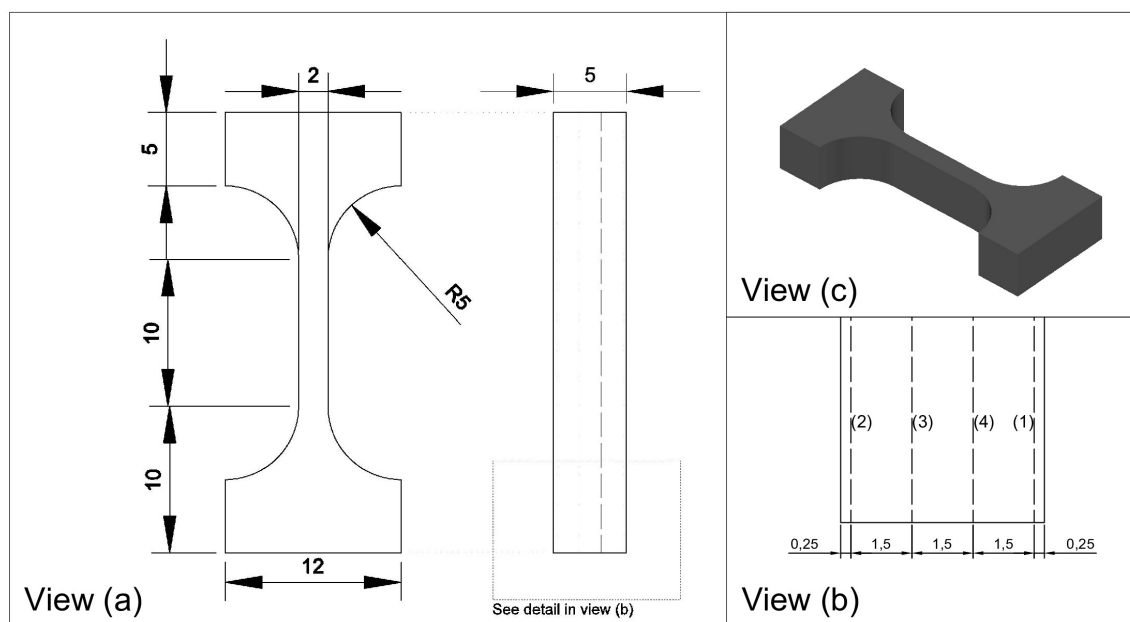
Dimensions and machining steps of the tensile specimen created in-situ (quotes in millimeters) - View (a): frontal and side view of the piece after milling - View (b): detail of the cuts performed by the grinding machine - View (c): Isometric view of the piece obtained after milling.
